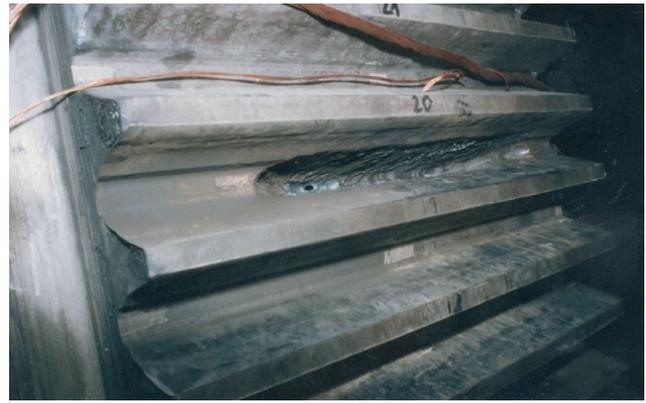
Cracks removal by arc-air grooving before repair welding and subsequent slow cooling
